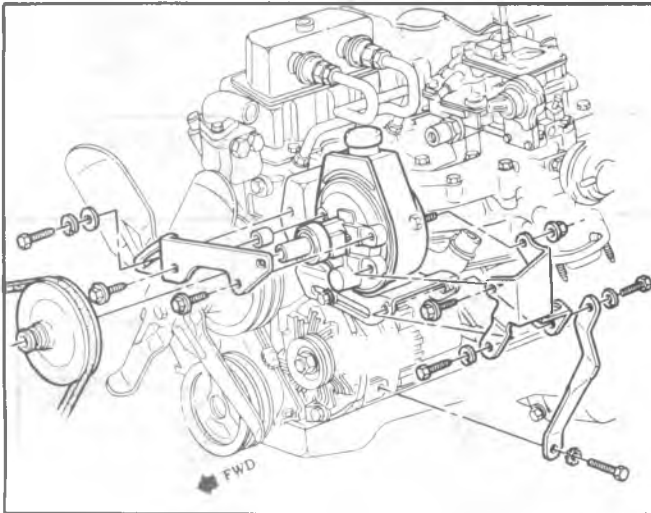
B3-15--P/S Pump Mounting; CK100, CK200 (03) with LE3 Engine
